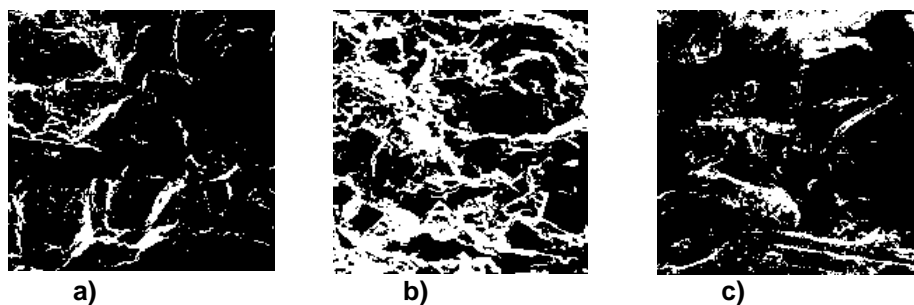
Cutting surface state: a) after 15 minutes of machining with grooved wheel and CLTF supply; b) after 15 minutes of machining with grooved wheel and vortex cooling; c) after 15 minutes of machining with solid wheel
